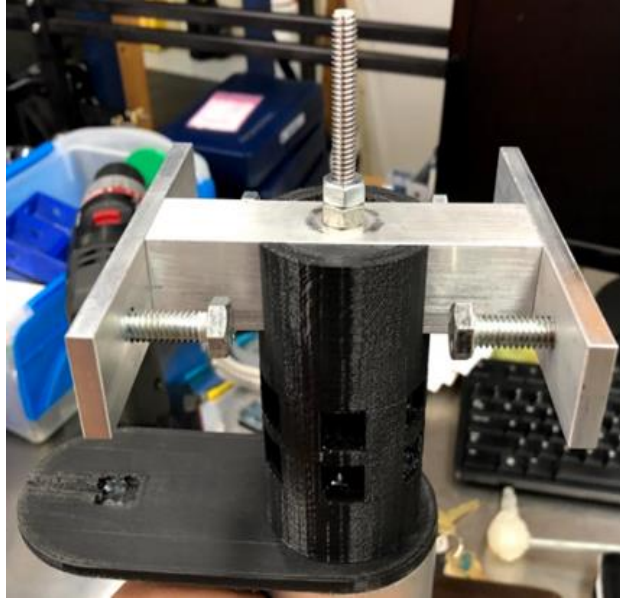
Aluminum mounting structure with the attached wheel spoke brace.
